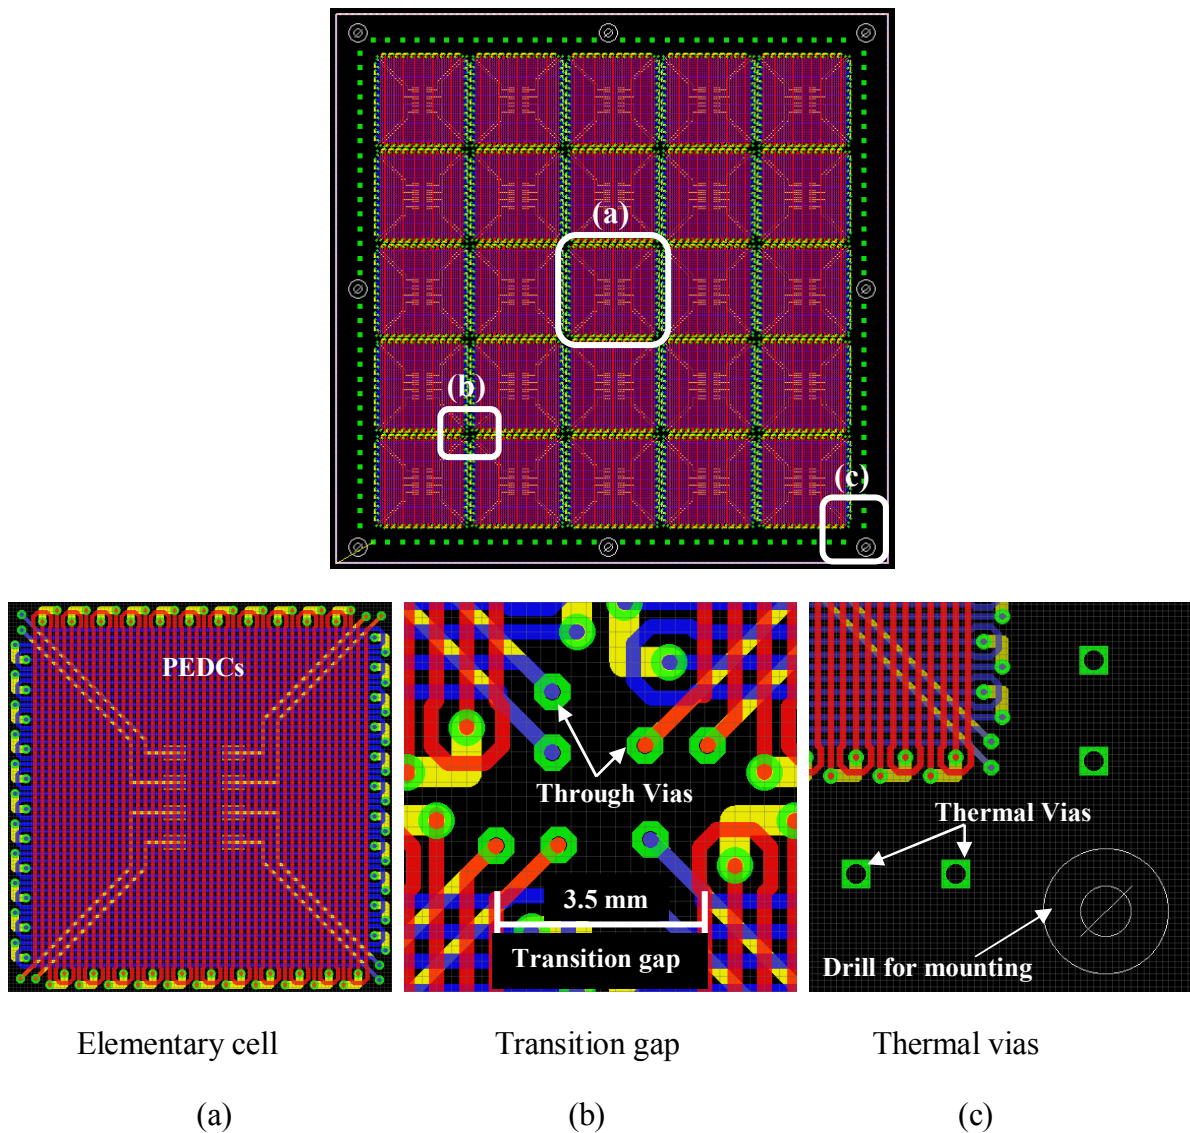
CAD view of 4 layer PCB design (a) Elementary cell (b) Design constraints (c) Thermal vias
